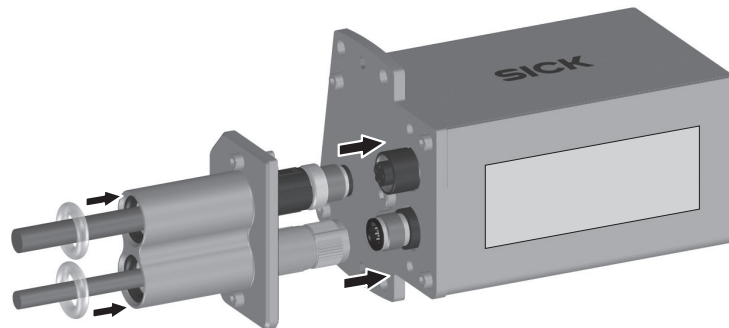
Assembly of IP69K protective housing, with use of the Ethernet connection – Step 2
